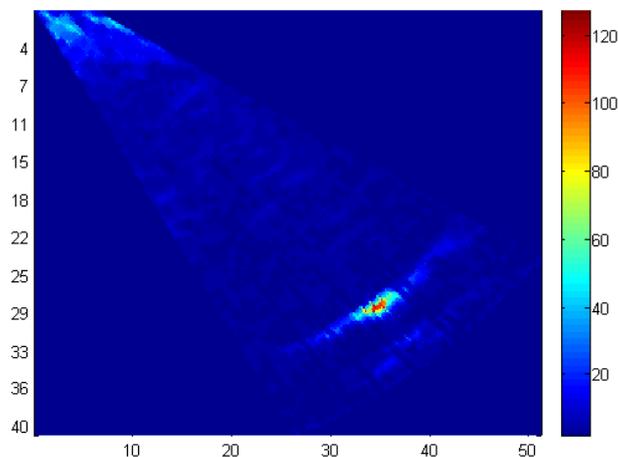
The Sector Scan of Flat-Bottomed Hole
